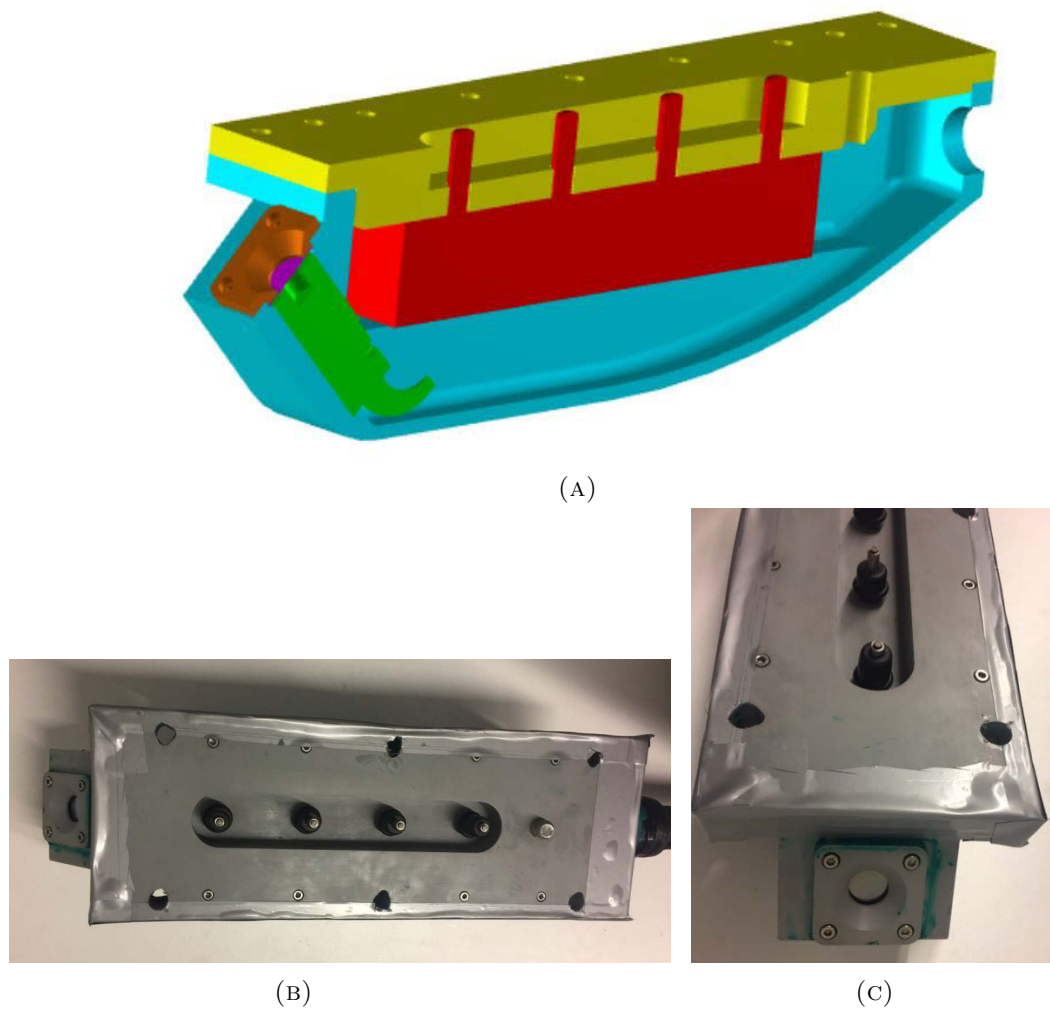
Sensor enclosure. (A) New enclosure CAD Model (B) Top-view of the sensor enclosure (C) Front-view of the sensor enclosure.
